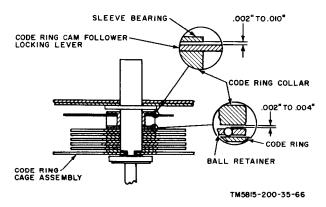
Code rings and code ring cam follower locking lever end play adjustment.
